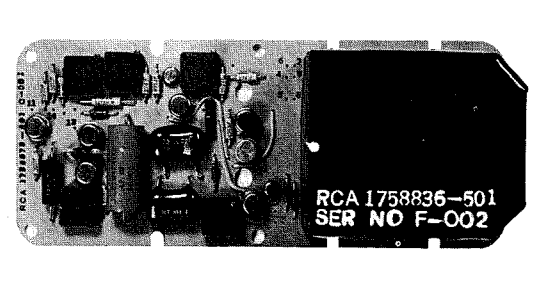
Deflection circuitry and beam-current regulator board assembly.
